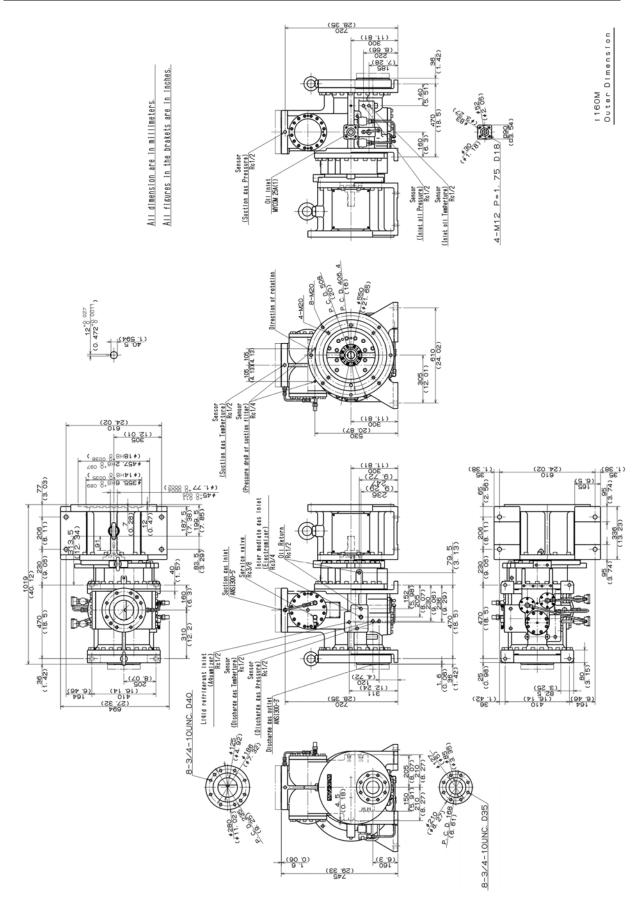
i160M Outer Dimensions with a Spacer for Flange Motor (NEMA)
